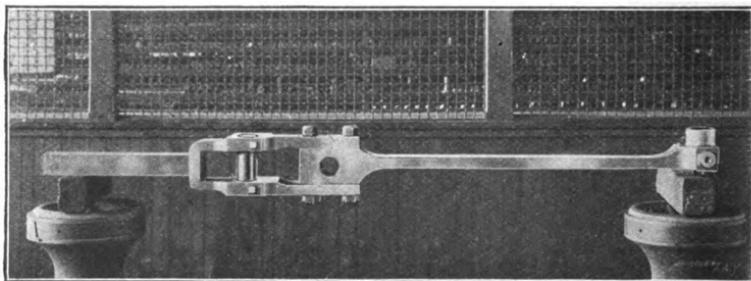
Radius Rod Extension with Slotting Complete—Assembled with Radius Rod
